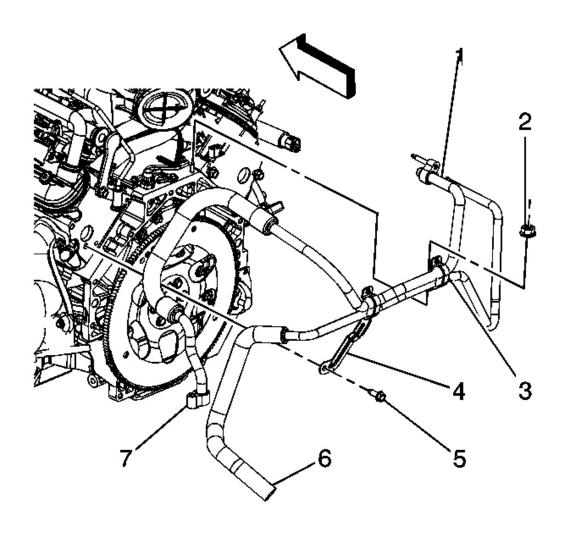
View Of Rear A/C Lines Courtesy of GENERAL MOTORS CORP.
